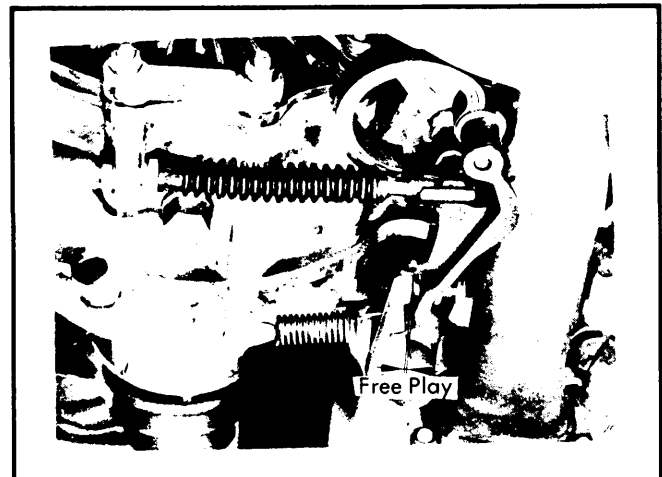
View of Clutch Adjusting Mechanism (911SC & Turbo)
